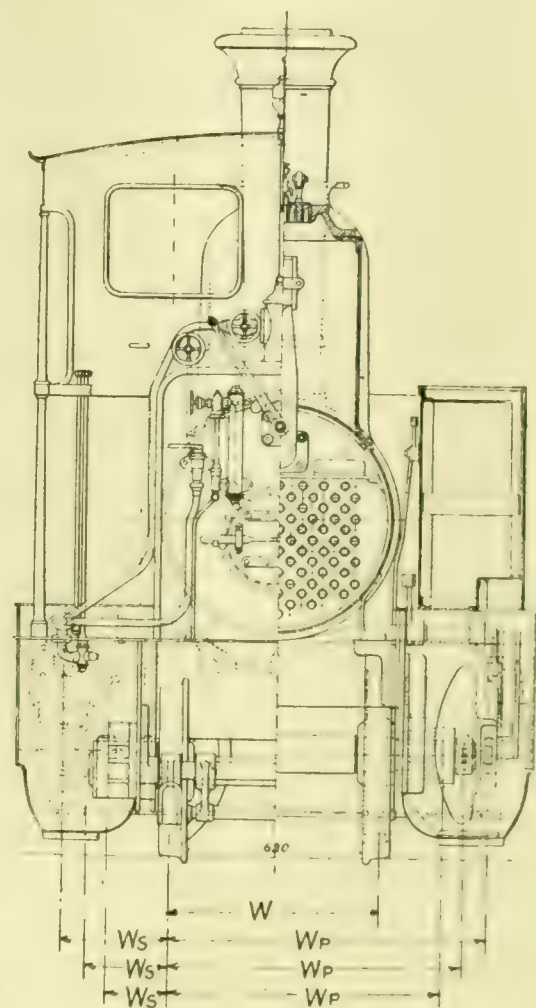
CROSS-SECTION OF LOCOMOTIVE WITH SEPARATE OUTSIDE CRANKS SHOWING HEAVY PRIMARY AND SECONDARY BALANCE WEIGHTS REQUIRED
